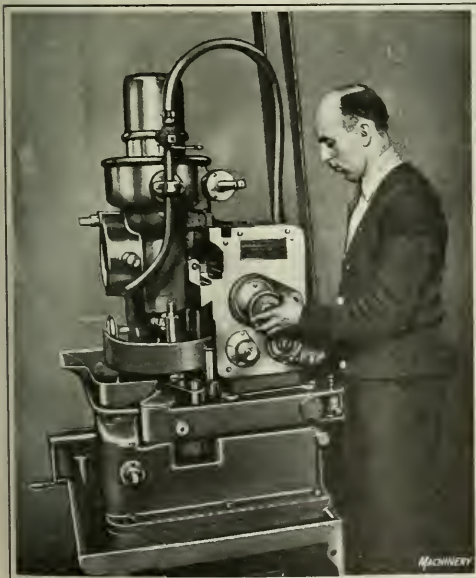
View of Right-hand End of Machine showing Speed-change Gears and Relieving Arm connected to Work Apron Lever
